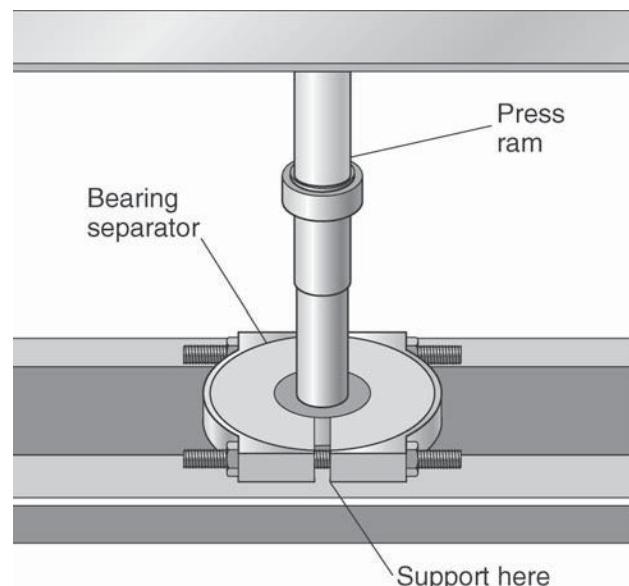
Press and bearing puller used to install a bearing on a shaft. (Courtesy of Ford Motor Company)
